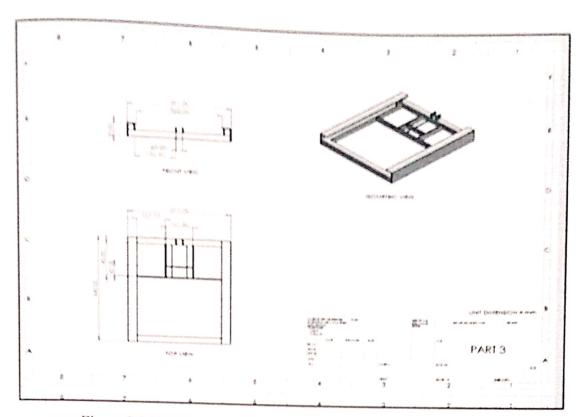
Drawing of bottom metal frame seat in front and top view
